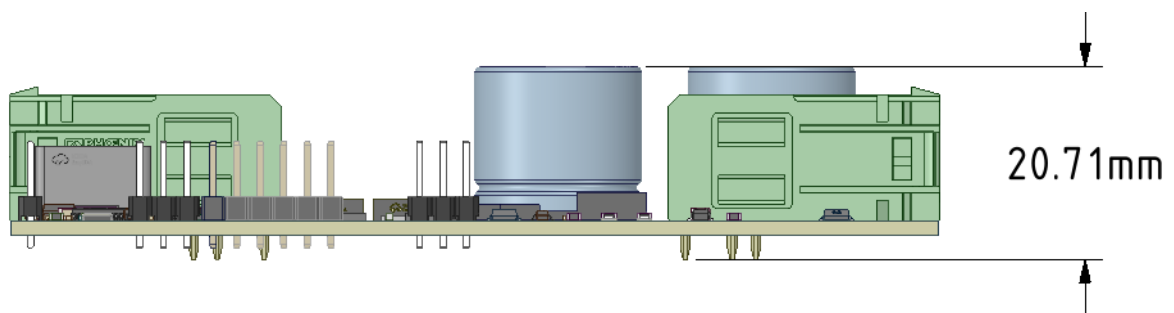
ZIKODRIVE 2 Side View (Without Casing)
